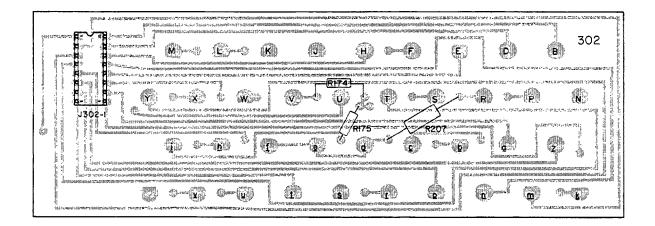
P.C. BOARD ASSEMBLY, BOARD 302, DRAWING
